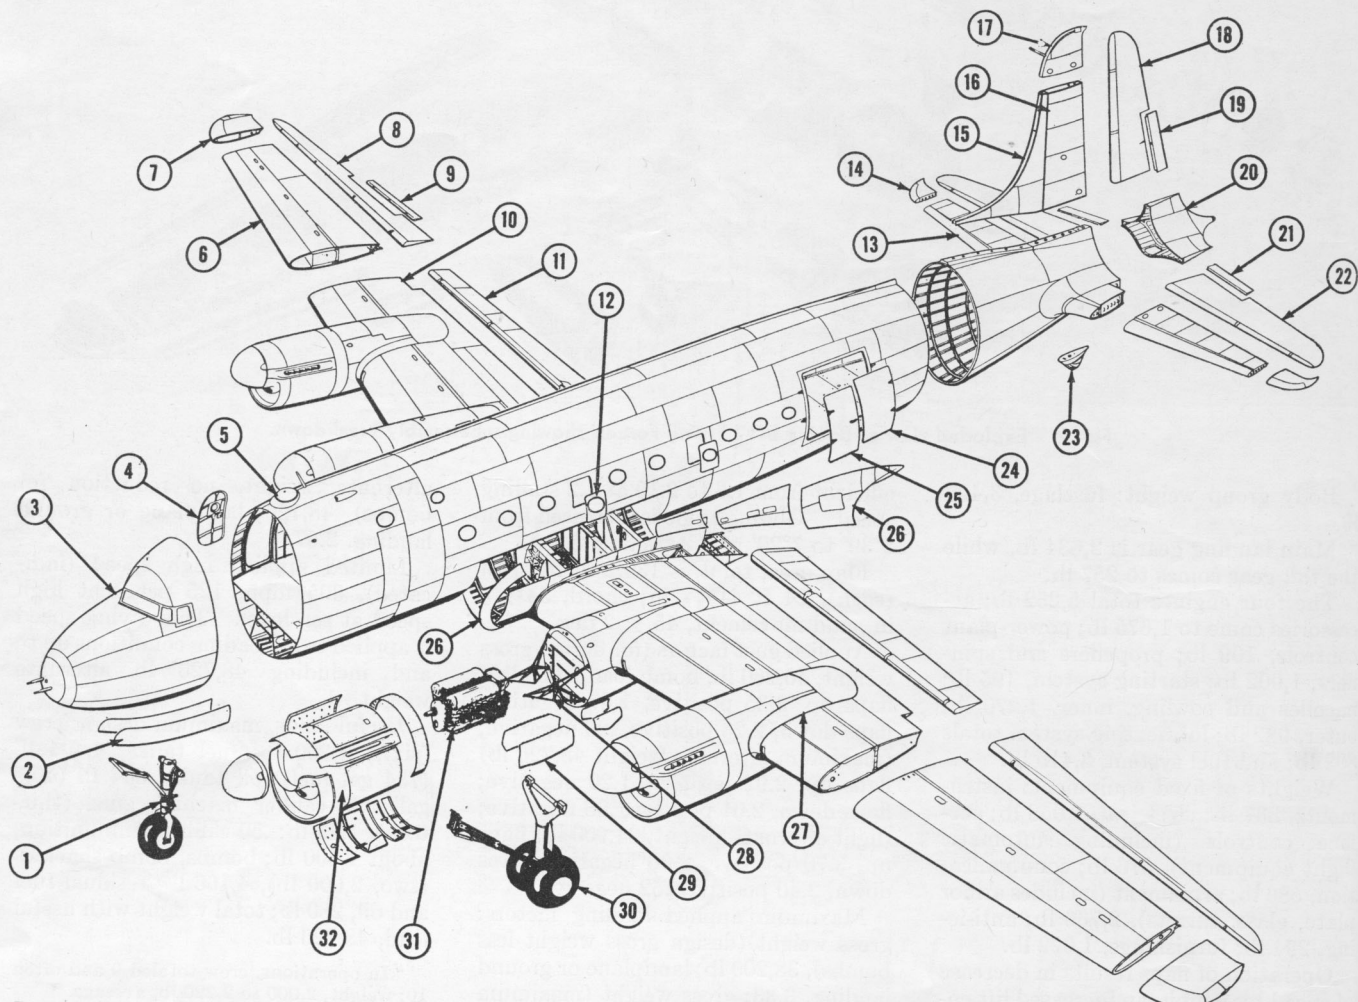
Exploded view of North Star transport: (1) nose gear; (2) nose-gear doors; (3) fuselage nose section; (4) pilots' entrance door; (5) astrodome; (6) outer wing panel; (7) wing tip; (8) aileron; (9) aileron tab; (10) inner wing panel; (11) flap; (12) emergency exit; (13) horizontal stabilizer; (14) stabilizer tip; (15) fin nose section; (16) fin; (17) fin tip; (18) rudder; (19) tab; (20) tail cone; (21) elevator tab; (22) elevator; (23) tail skid; (24) aft main cargo door; (25) forward cargo door; (26) wing-to-fuselage fairing; (27) nacelle fairing; (28) engine mount; (29) main gear door; (30) main landing gear; (31) engine; (32) cowling.
